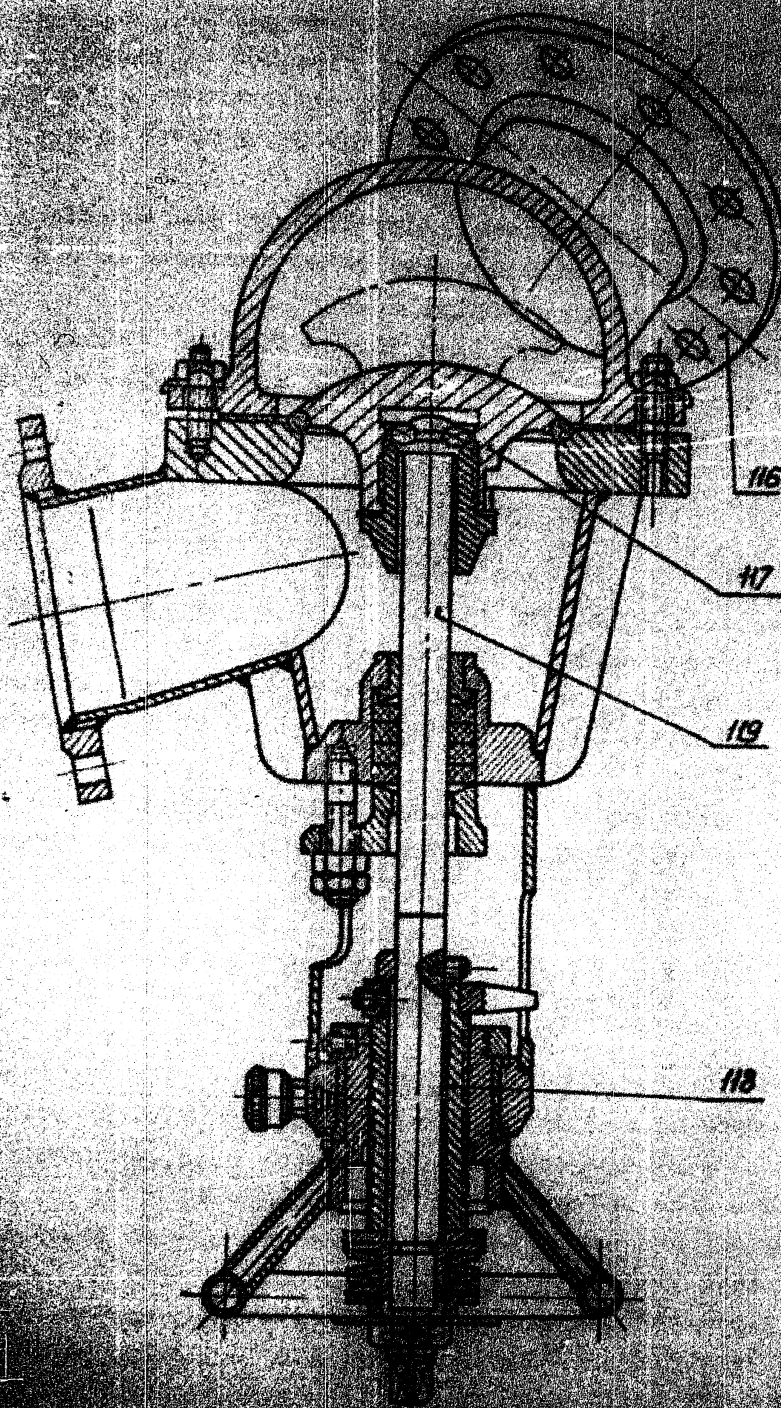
DIESEL COMPRESSOR WITH EXHAUST VALVE
